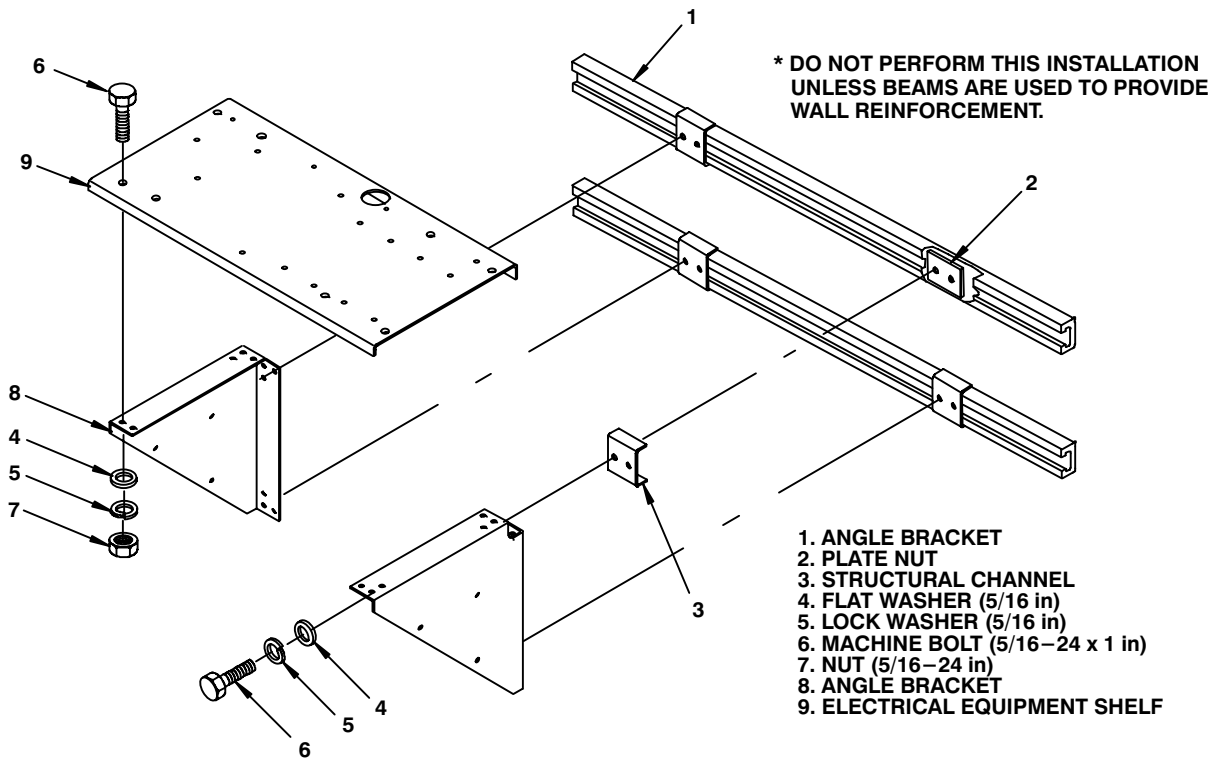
(5). Electrical Equipment Shelf Installation: Alternate Installation D
